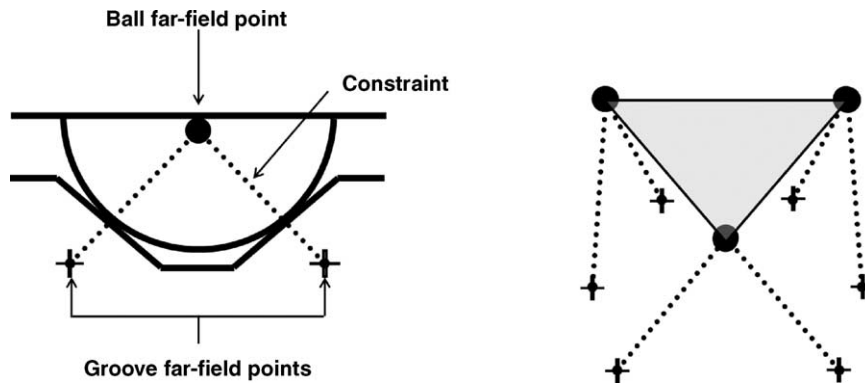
Analogy between a kinematic fixture and a six-axis parallel mechanism. Left: two constraints at a ball–groove joint. Right: six constraints in a three-groove fixture.
